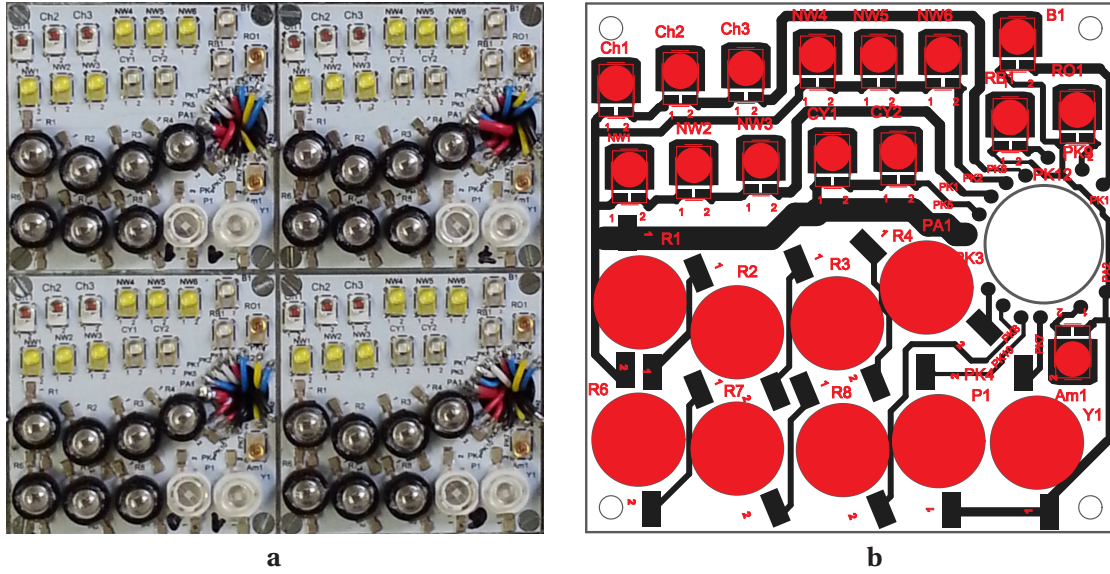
(a): Photograph of four PCBs with mounted LEDs. (b): Technical drawing of one PCB with LEDs.
